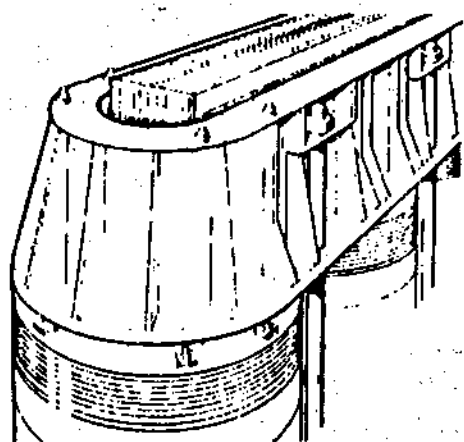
Typical bolted clamping structure used in older transformers.
